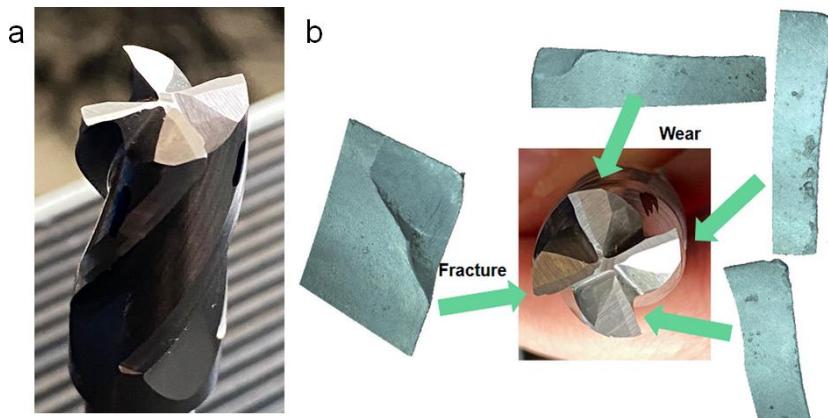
(a) Endmill used for the machining experiments, (b) upper view of an endmill used to produce the workpieces showing wear and chipping.
